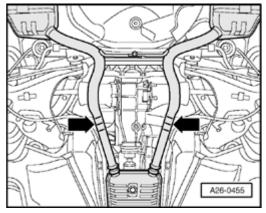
Separating Exhaust Pipes At Separating Point Using Chain Pipe Cutter VAS 6254 At A Right Angle
